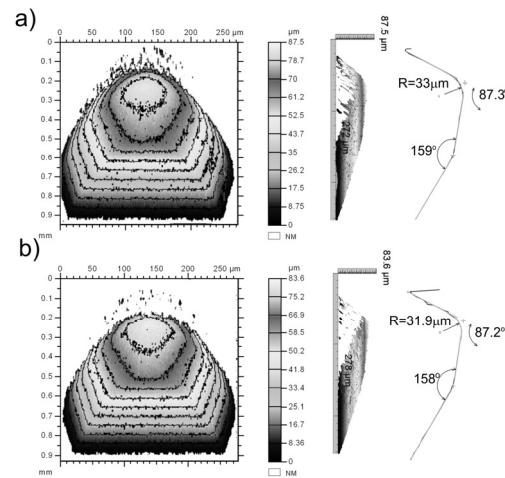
Measurement of chamfered corner for tool material a) 7020 and b) CB20
